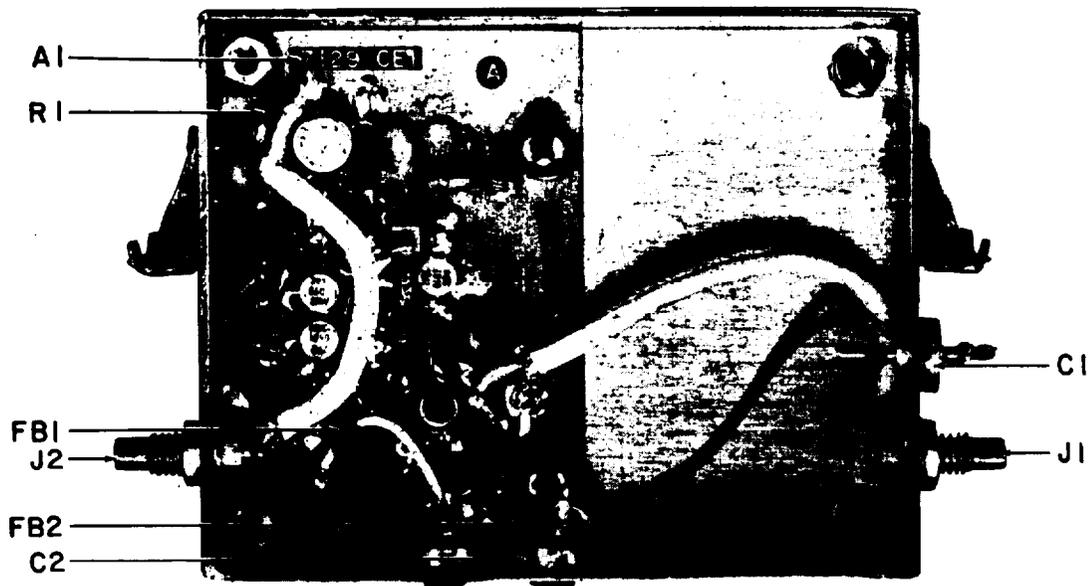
Type 791834 560 MHz Binary Divider Assembly (A2), Location of Components
